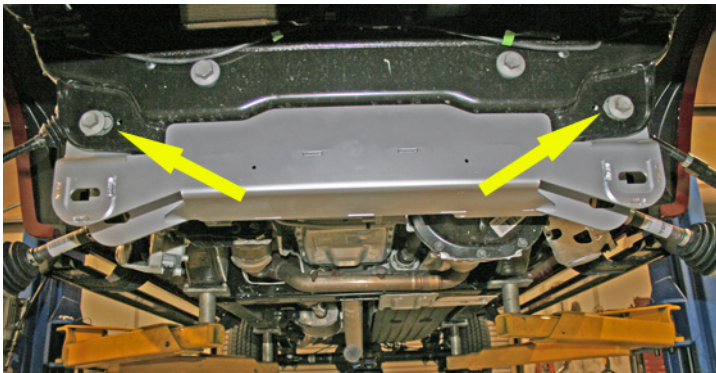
Install the supplied 9/16" x 3-3/4" bolt, washer, and nut from the rear, through the sway bar bracket, differential rear mount and the rear crossmember. Do not tighten.
